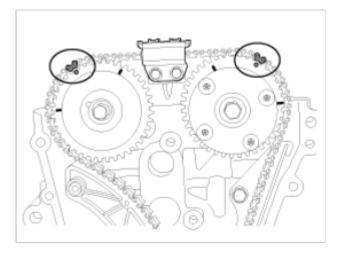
Identifying Timing Mark On Intake Camshaft Sprocket And Exhaust Camshaft Sprocket
